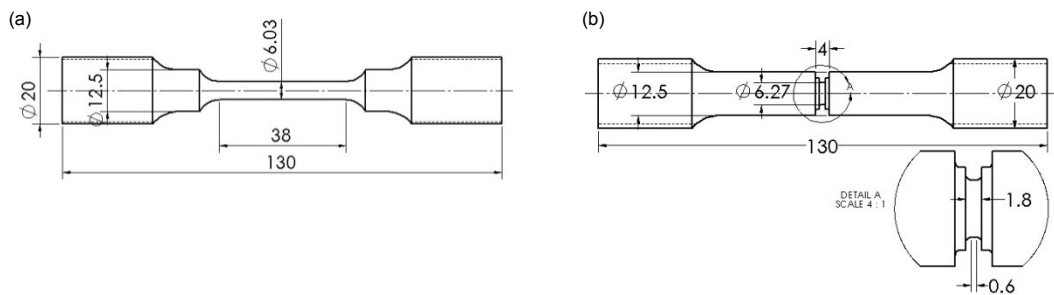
Geometry and dimensions of (a) smooth and (b) short-gauge specimens
